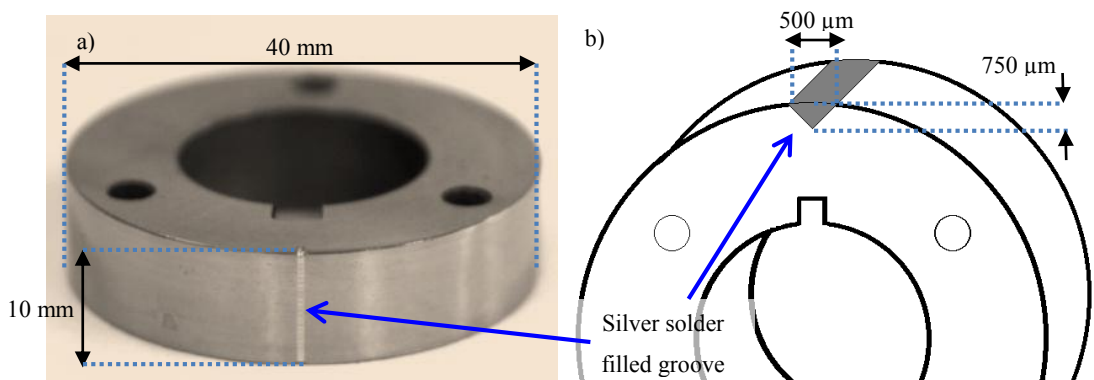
Illustrations of the Impulse Disc specimen a) photograph b) schematic showing the weld geometry
